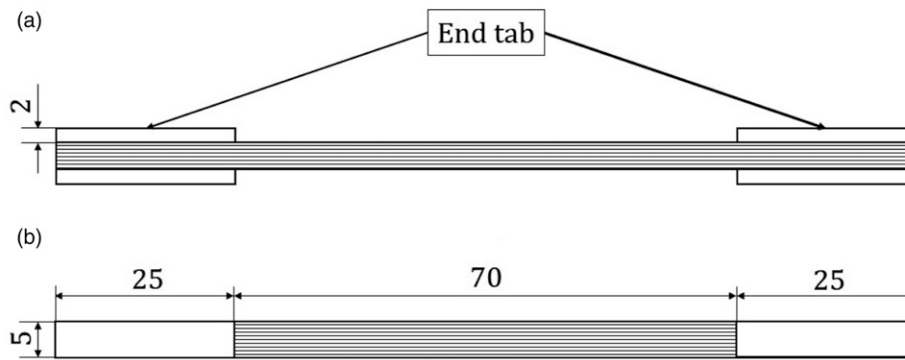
Geometry of tensile specimens, (a) side view, (b) top view, (dimensions in mm).
